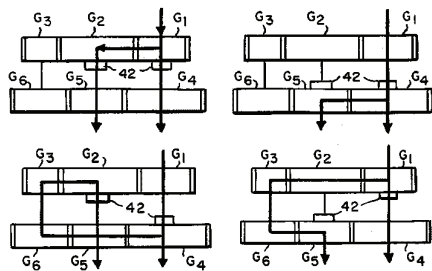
Geared drive with variable structure of Reducing Sizing Mill (RSM)
